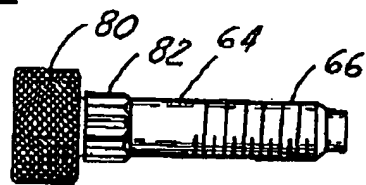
is a partial cutaway view of a stud assembly according to the present invention; and
